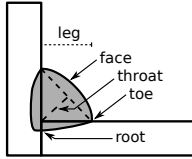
There are five pieces to a fillet weld known as the root, toe, face, leg and throat, usually given in technical drawings as weld thickness a [6].
